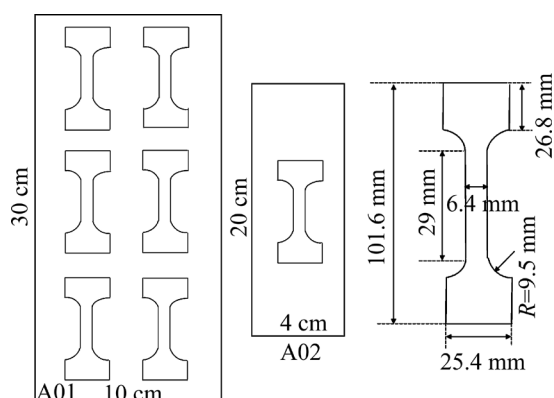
Sampling location and size of A01 and A02 tensile test specimens
